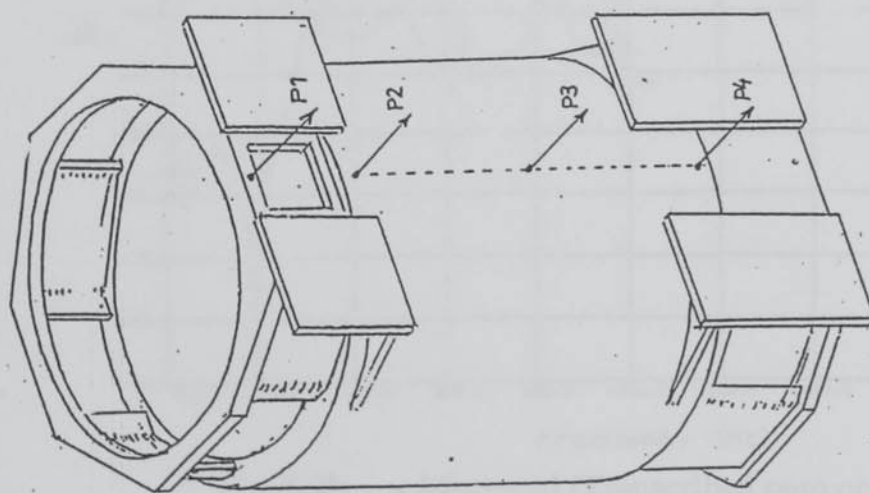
Stripped and Unthreaded Frame of Machine "A".
